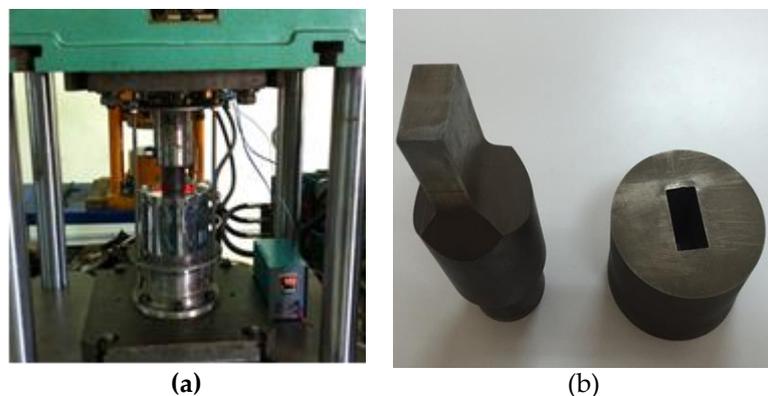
Scheme of CCDF set-up and tools (a) The experiment die; (b) Punch and die
